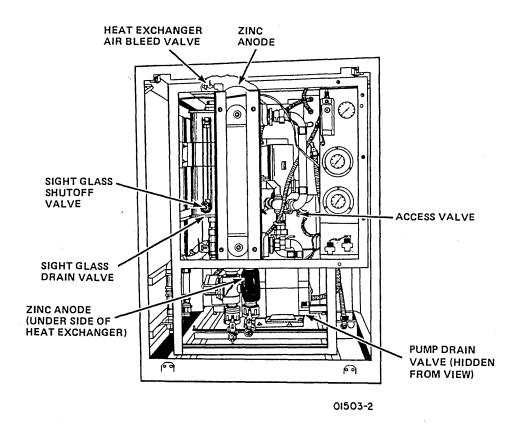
Valve Locations on 102-L/min (27-gal/min) Unit (Front)
